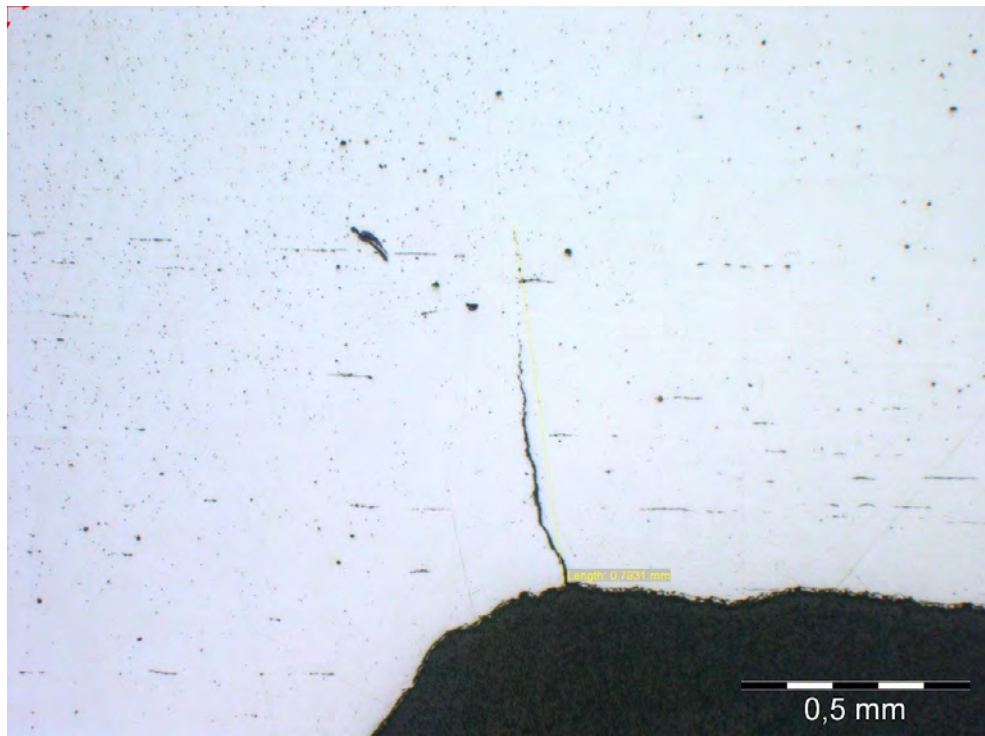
Crack at segment A, first ridge on barrel no. SFK 0120-A
